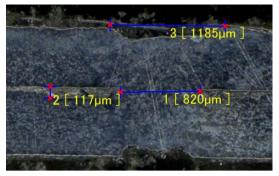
Picture of weld with spacer sheets, with 4 mm defocus
